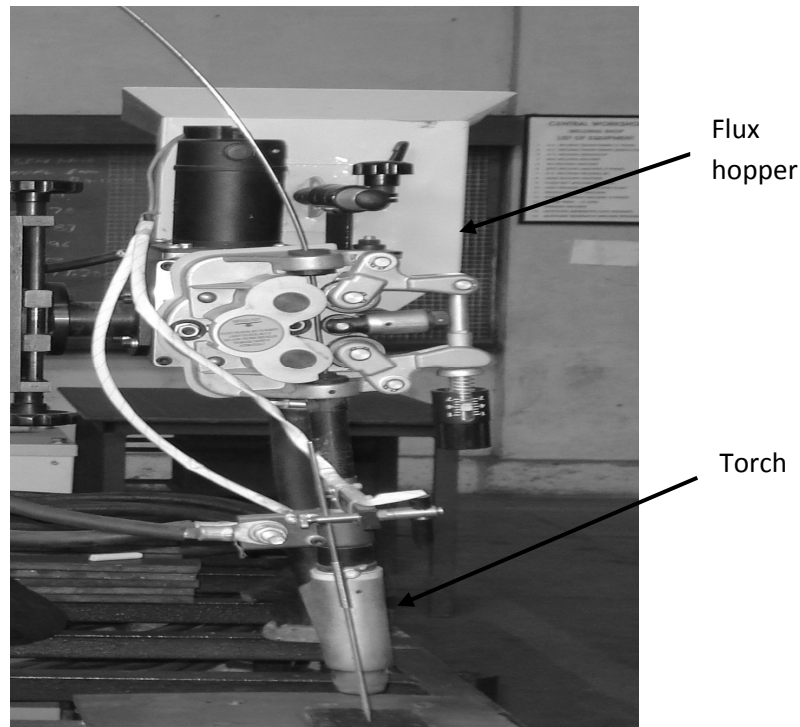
Torch with Flux Hopper for SAW Welding Tractor
